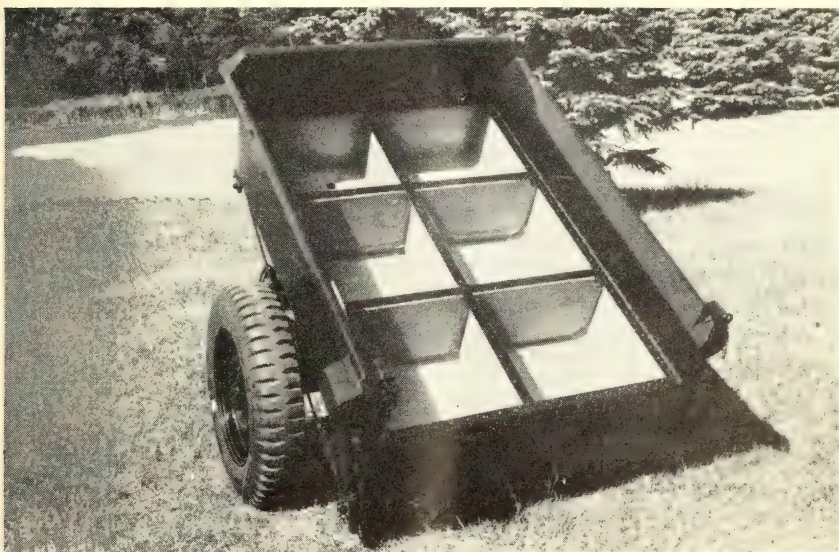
The original trailer box is easily converted. The baffle plates contribute to improved travel characteristics, especially in the absence of springs. The tapped holes for attaching the cover plate are all located in the top surface of the angles. By removing the top plate the interior is easily accessible for repair, refinishing, or cleaning.
